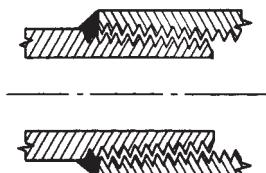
Taper pipe thread seal-welded.
